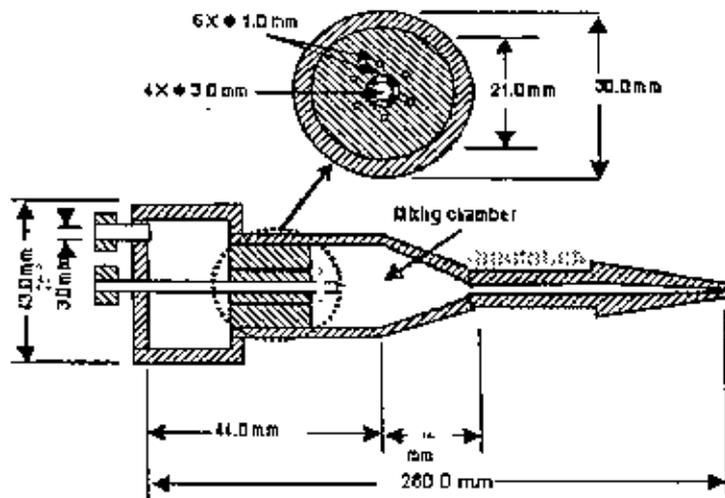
Schematic view of the nozzle with mixing chamber
